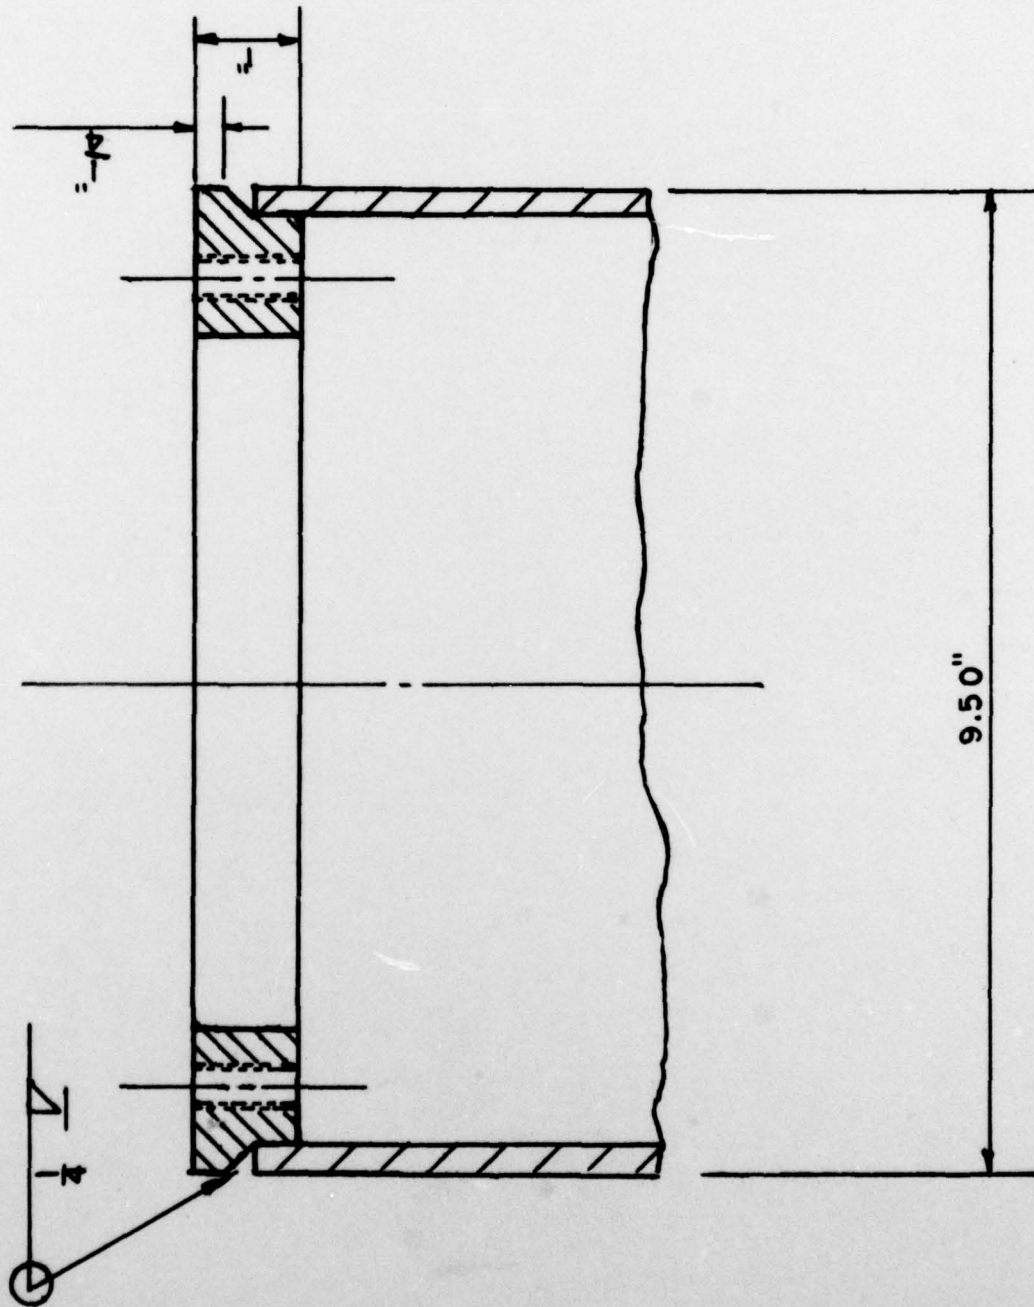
MODIFIED TOP INSIDE FLANGE RING USED ON THE PROTOTYPE UHF POLEMAST ANTENNA
